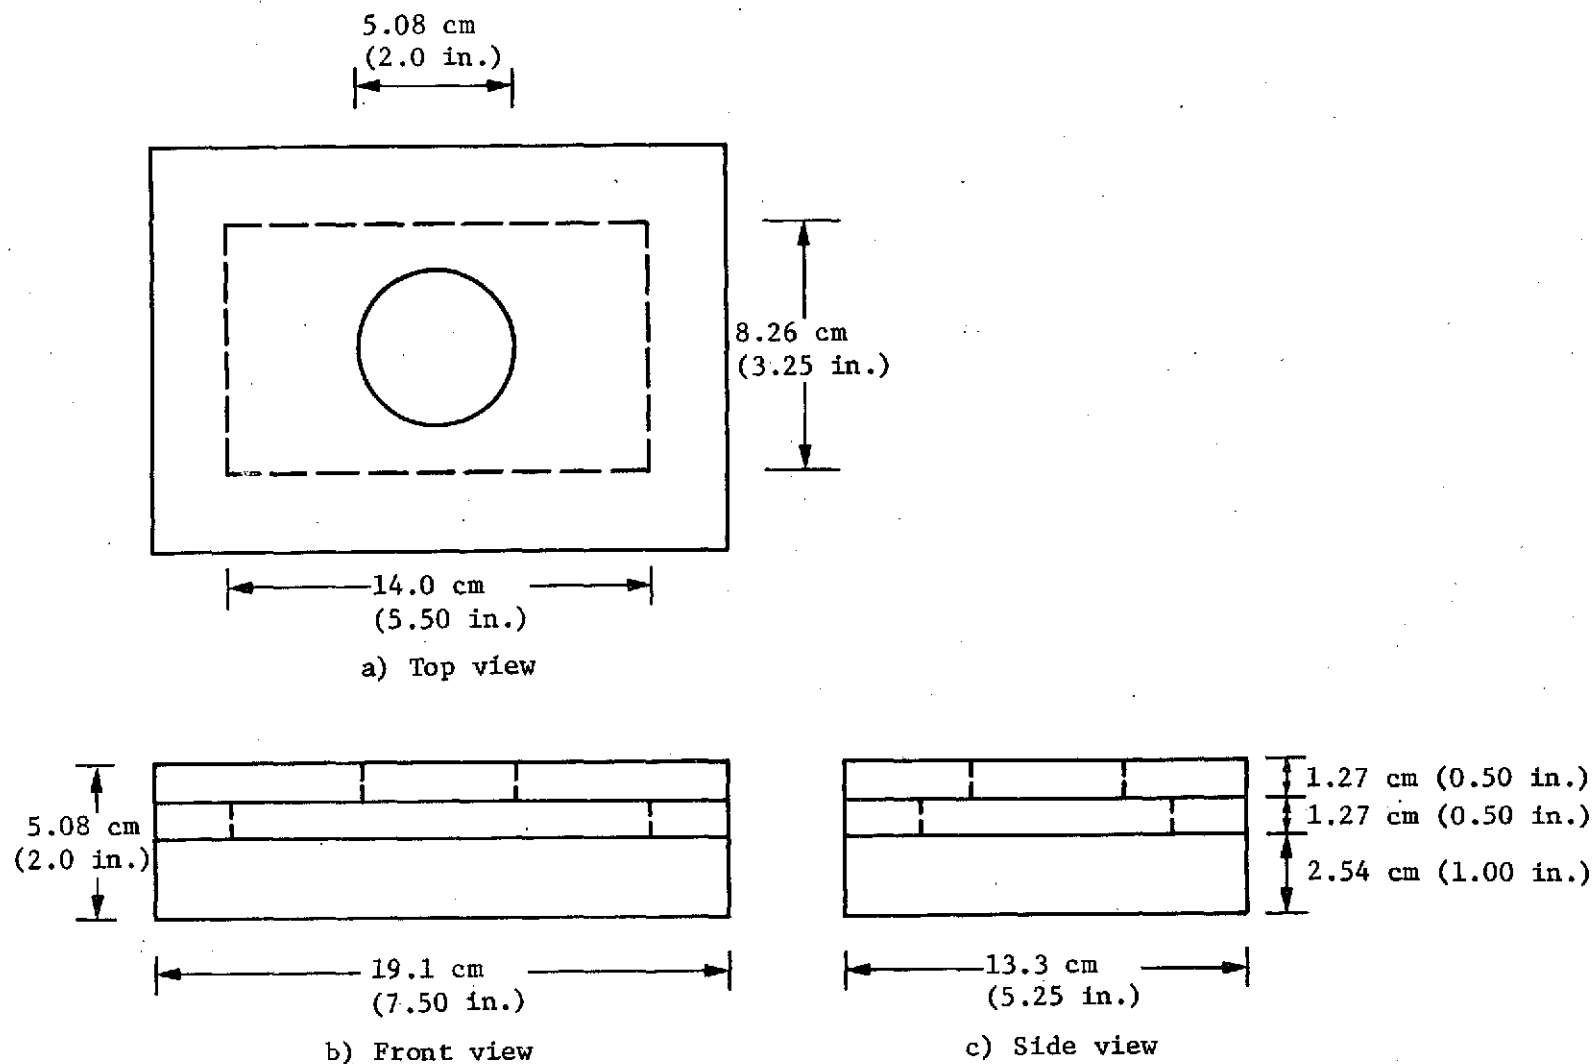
Plaster mold used to prepare the slip-cast, fused silica billet for the flexure tests
